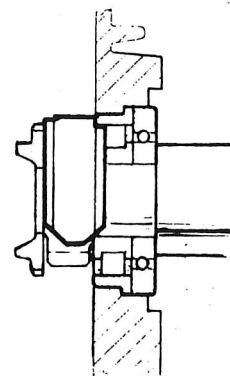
ADAPTOR 18G284AAC/2 IN POSITION
